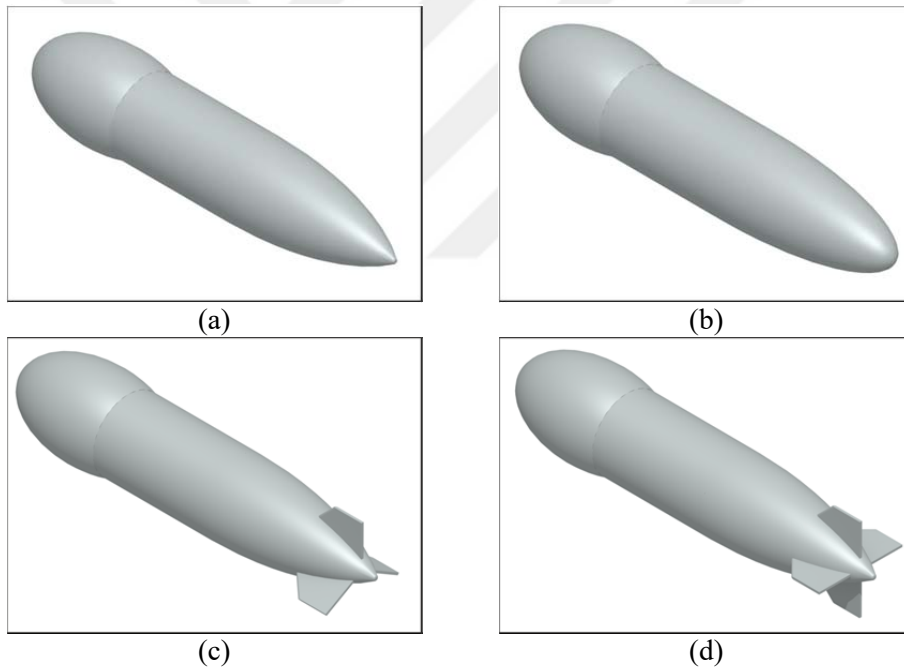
Isometric views of torpedo-like geometries which have cambered nose section and stern section of type; (a) Stern-I, (b) Stern-II, (c) 3-winged Stern-I, (d) 4-winged Stern-I
